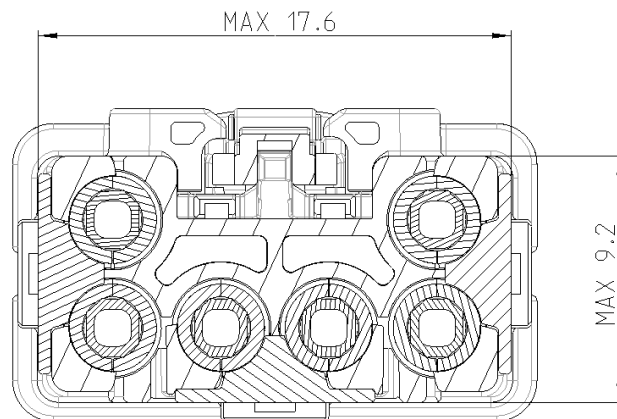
MAXIMUM DIMENSION WHEN TPAs ARE IN ENDLOCK POSITION
